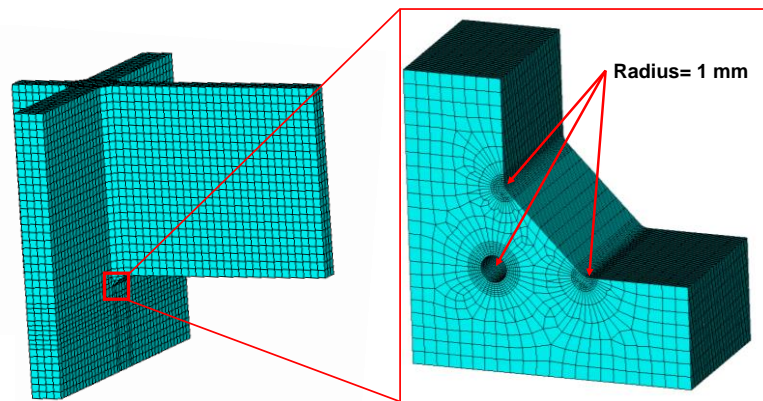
Fictitious notch at weld toe and the weld root.
